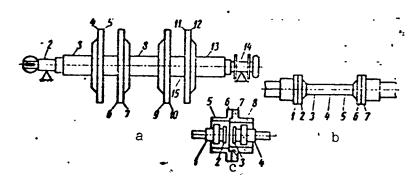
Arrangement for the checking of radial wobble: a) rotor of turbocompressor; b) high-speed toothed coupling; c) low-speed toothed coupling of reducer and electric motor.
